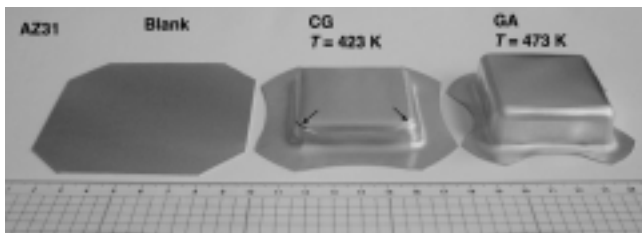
Appearances of blank (left), the part formed at 423 K using the CG material (center), and the part formed at 473 K using the GA material (right). Cracks are indicated by the arrows.
